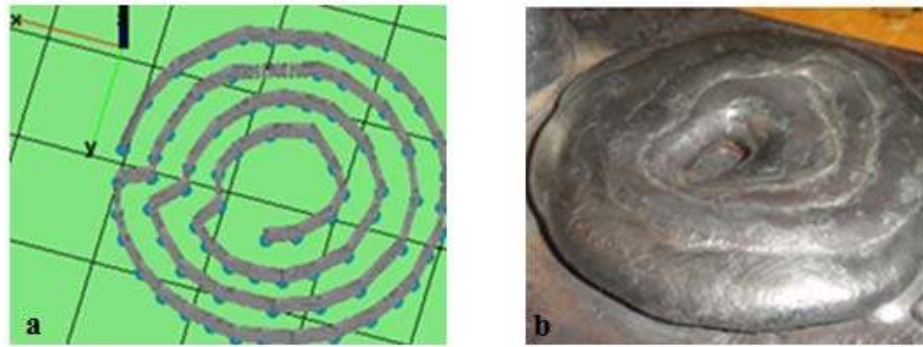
25. Path pattern for hollow filling cylindrical part, (a) CAD drawing of the combined path pattern by spiral strategy; (b) the real deposited part using the spiral path pattern after some of the layers.
